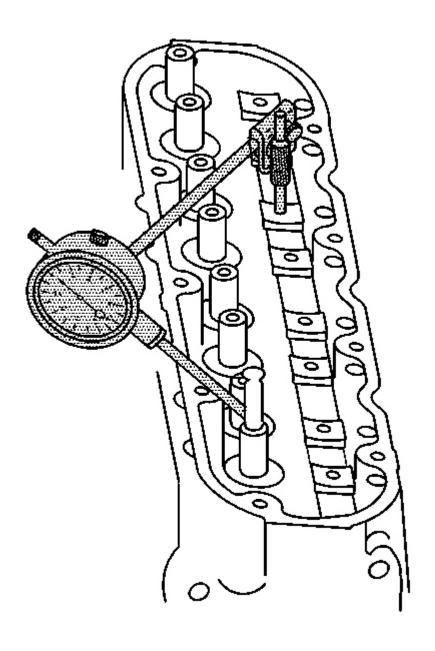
Measuring Valve Stem-To-Guide Clearance Courtesy of GENERAL MOTORS CORP.
